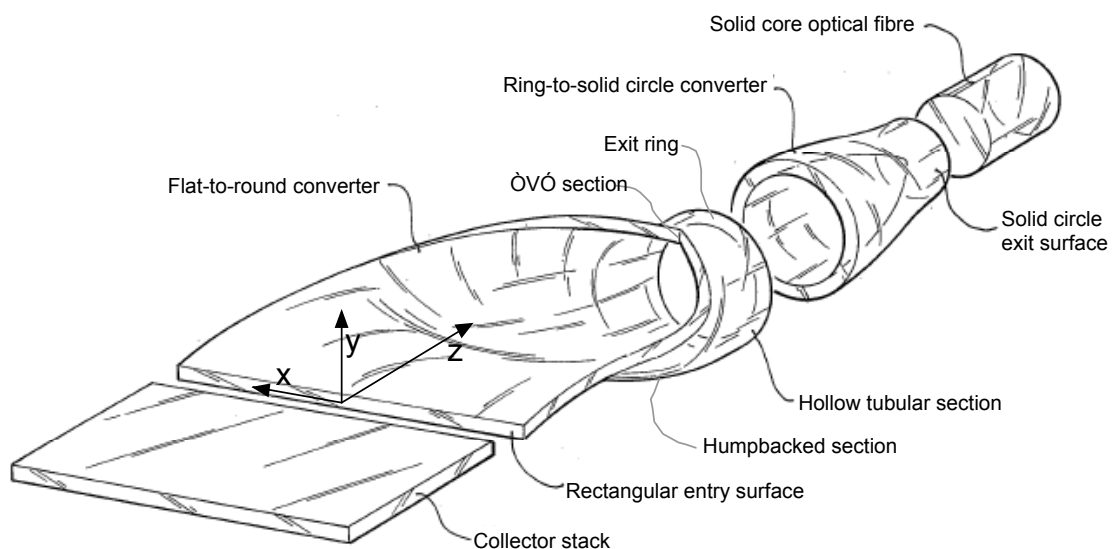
Exploded view of a “curled-sheet” flat-to-round converter that couples light from a rectangular entry section to a cylindrical optical fibre.
